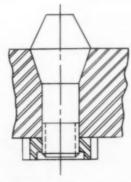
Core retained by nut. Tapered seat for flash prevention. Removable from parting line.
